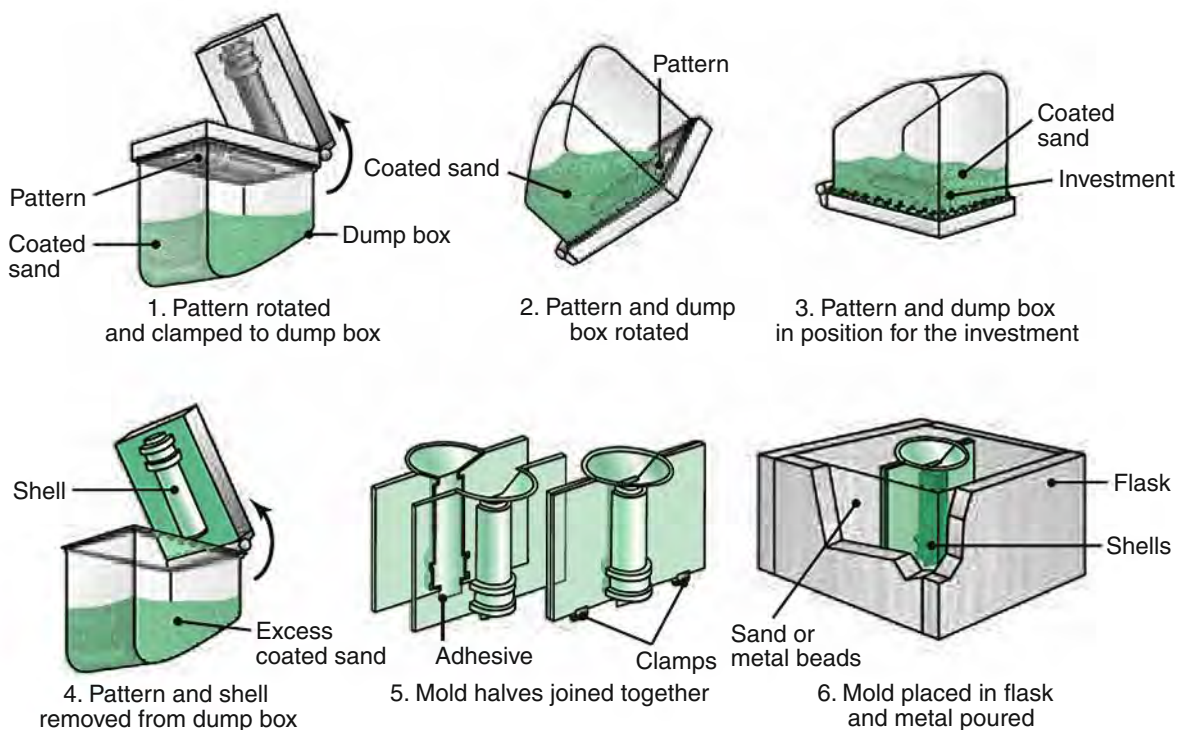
The shell-molding process, also called the *dump-box* technique.
